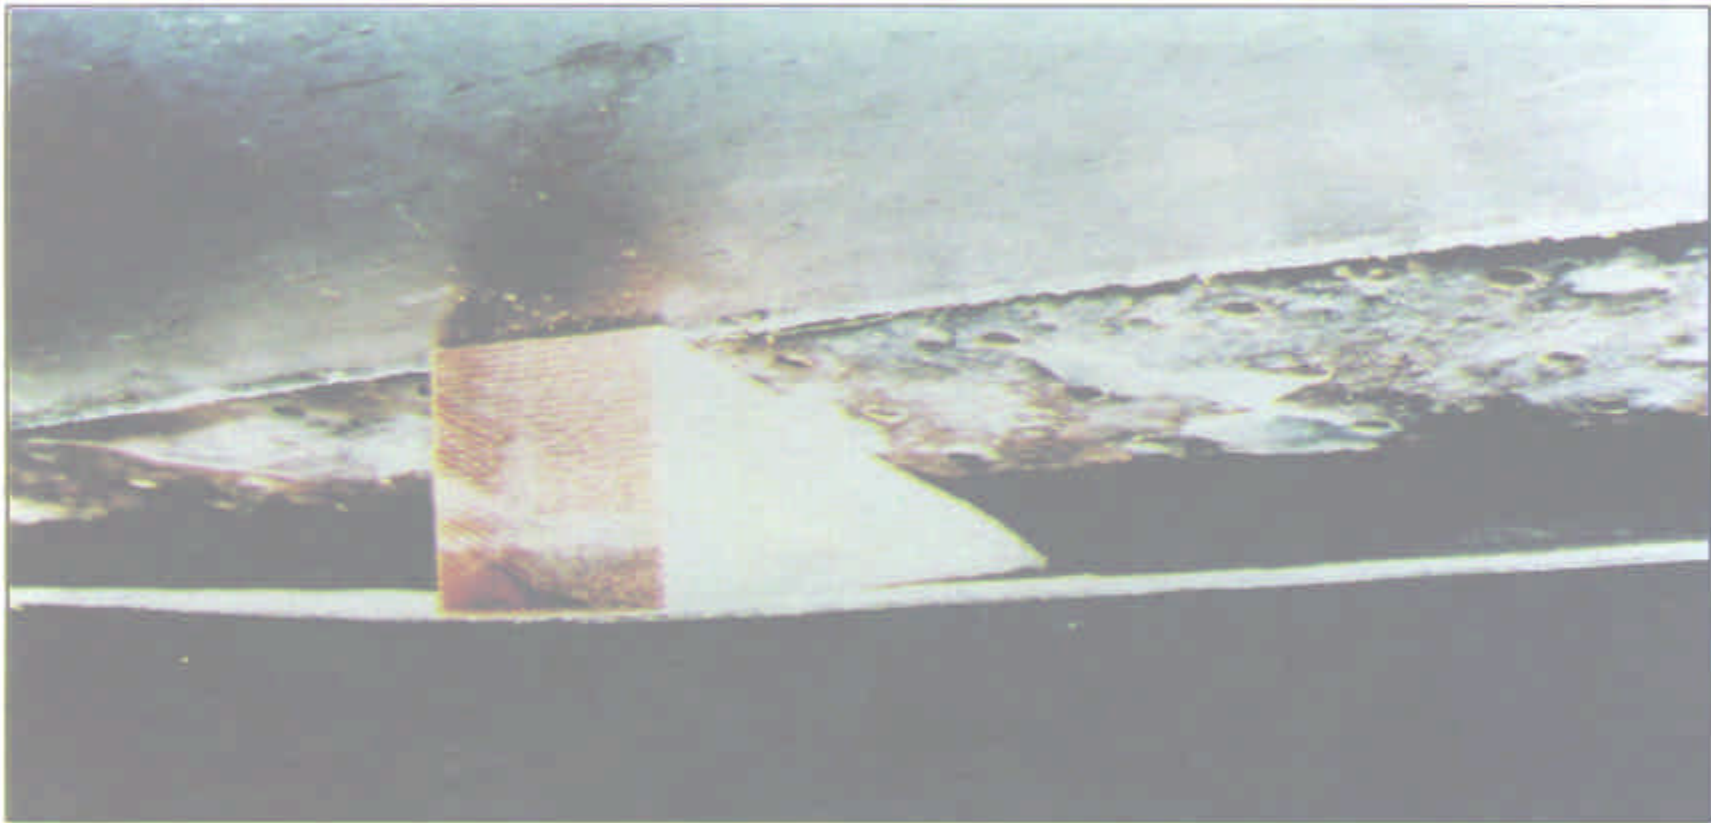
CLOSEUP VIEW OF A CORRODED LAP JOINT
